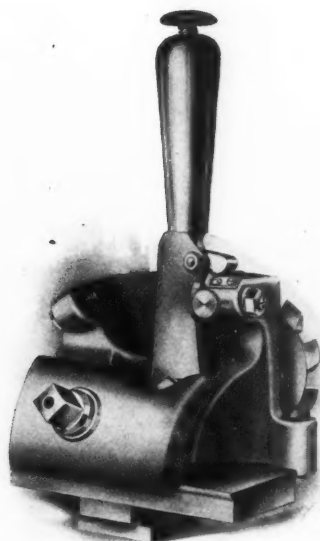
Rivett-Dock Thread Cutting Tool Assembled
